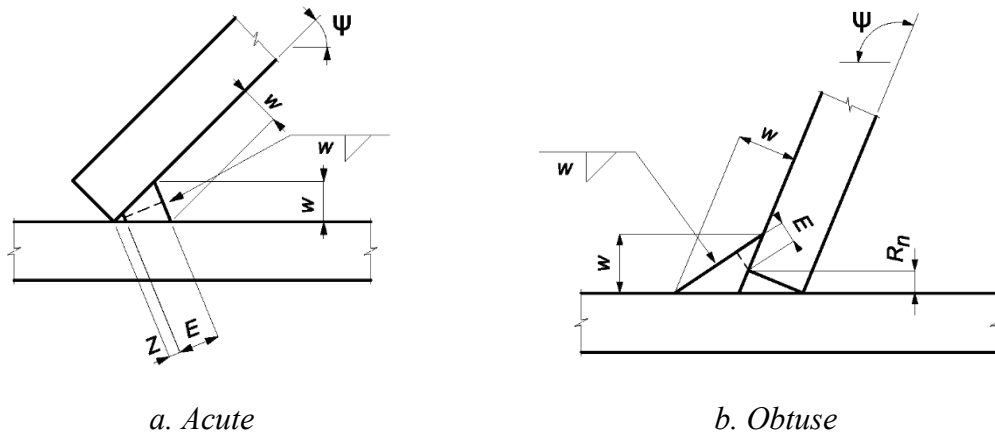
Welds with skewed dihedral angles.
